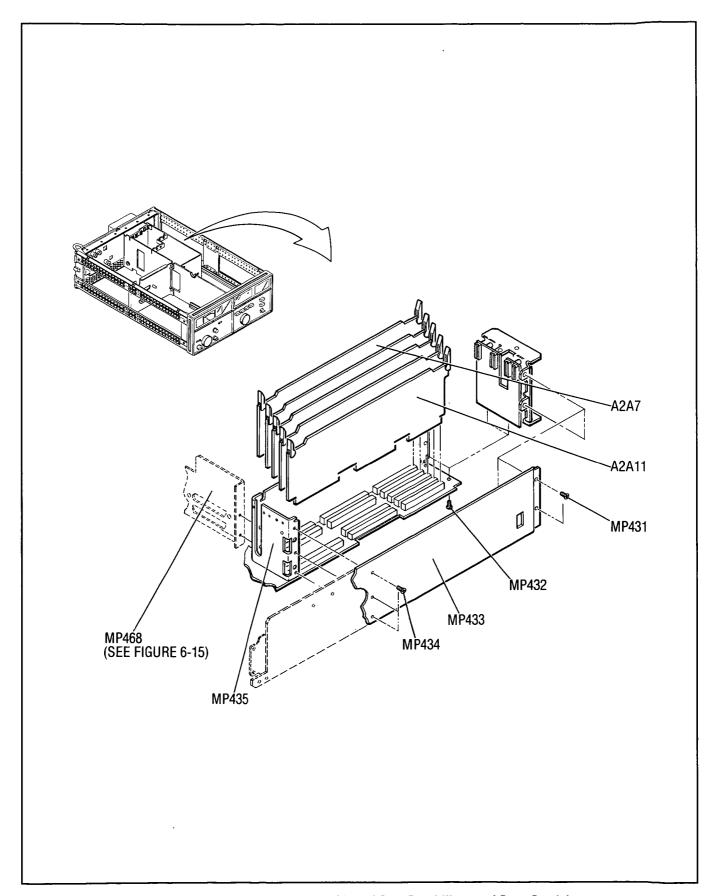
P/O A2 Controller Assembly and Rear Panel Illustrated Parts Breakdown
